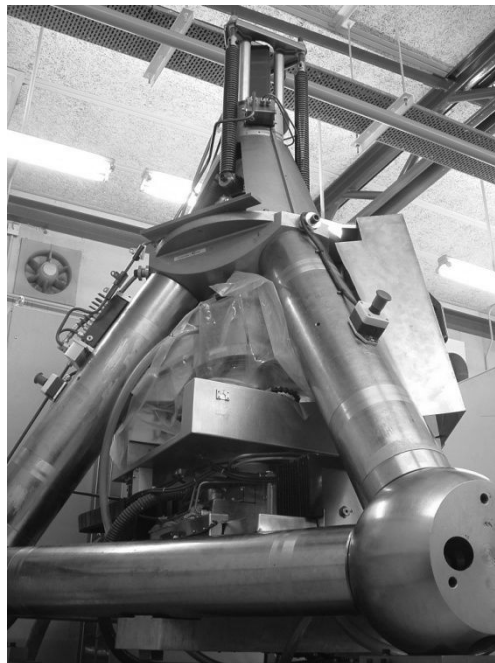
Tetraform face grinding machine as used in the preparation of surface and profile grinding samples
